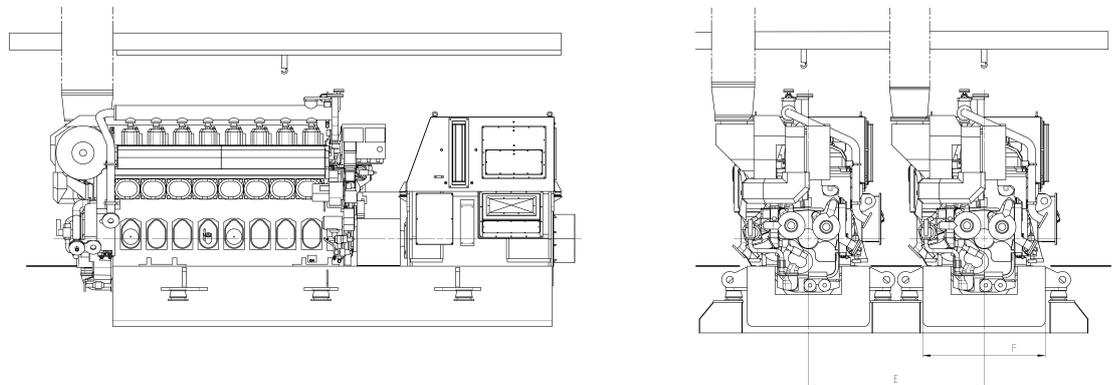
Crankshaft distances main engines (DAAF017589A)
